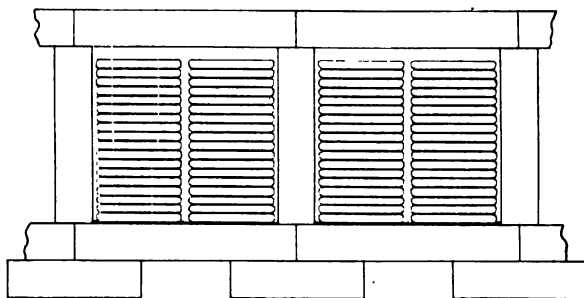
Method of Setting Shingle Tiles Flat, in Use at Murray Roofing Tile Company, Cloverport, Ky.
